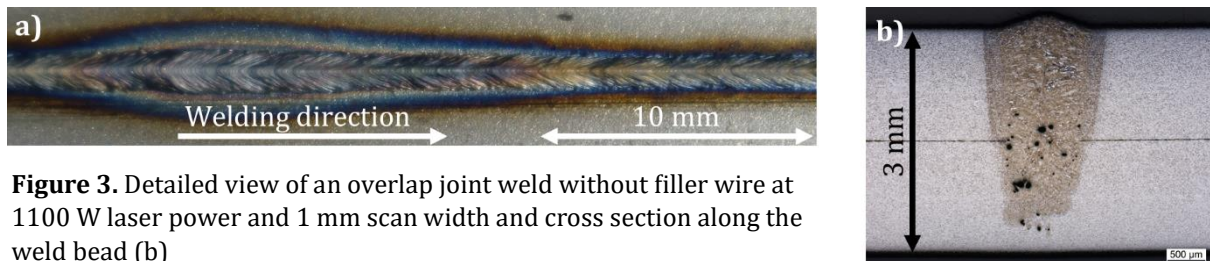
Detailed view of an overlap joint weld without filler wire at 1100 W laser power and 1 mm scan width and cross section along the weld bead (b)
